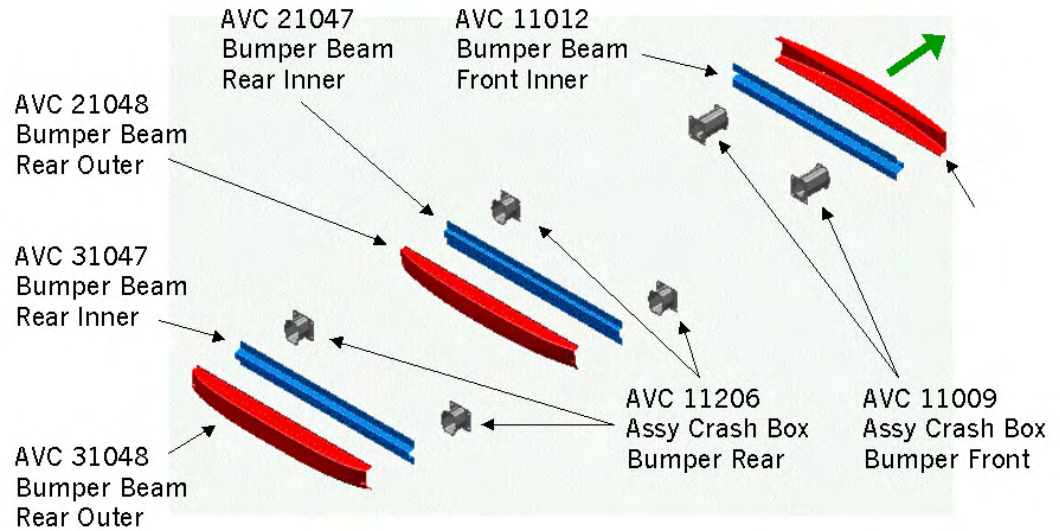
Bumpers Front and Rear exploded view
